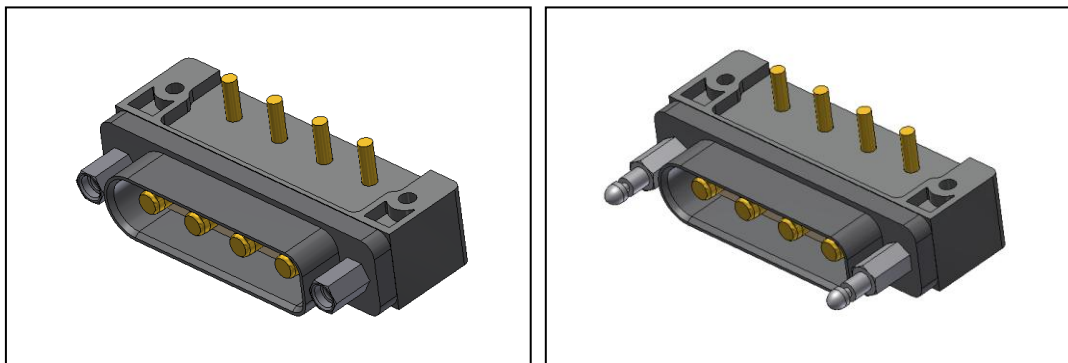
View of MMCA connectors for PCB connection (CBR version) .
